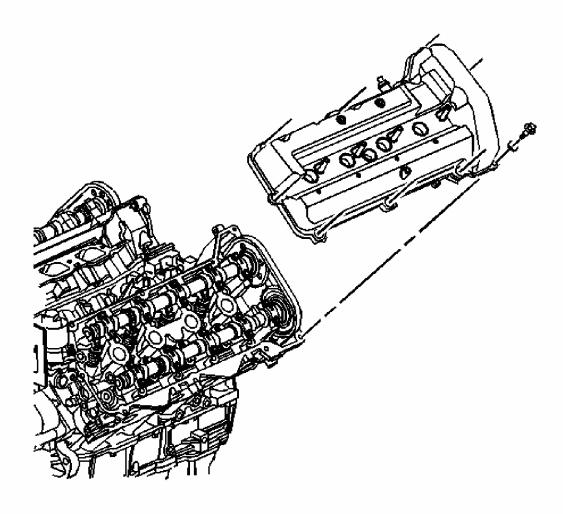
Removal/Installation Of Camshaft Cover Courtesy of GENERAL MOTORS CORP.
